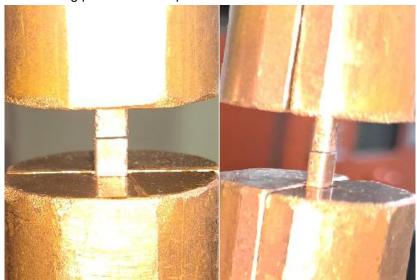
Cu-Nb 18% microcomposite conductor assembly prior to welding
